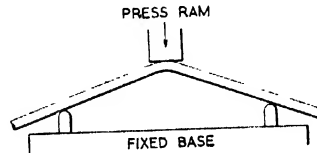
PRESS STRAIGHTENING BY PRESSING THE BAR OR TUBE BETWEEN THREE PRESSURE POINTS
